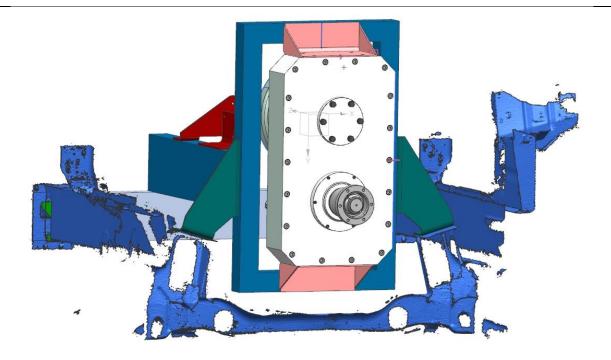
3D view of the gearbox mounted on the chassis of the vehicle
